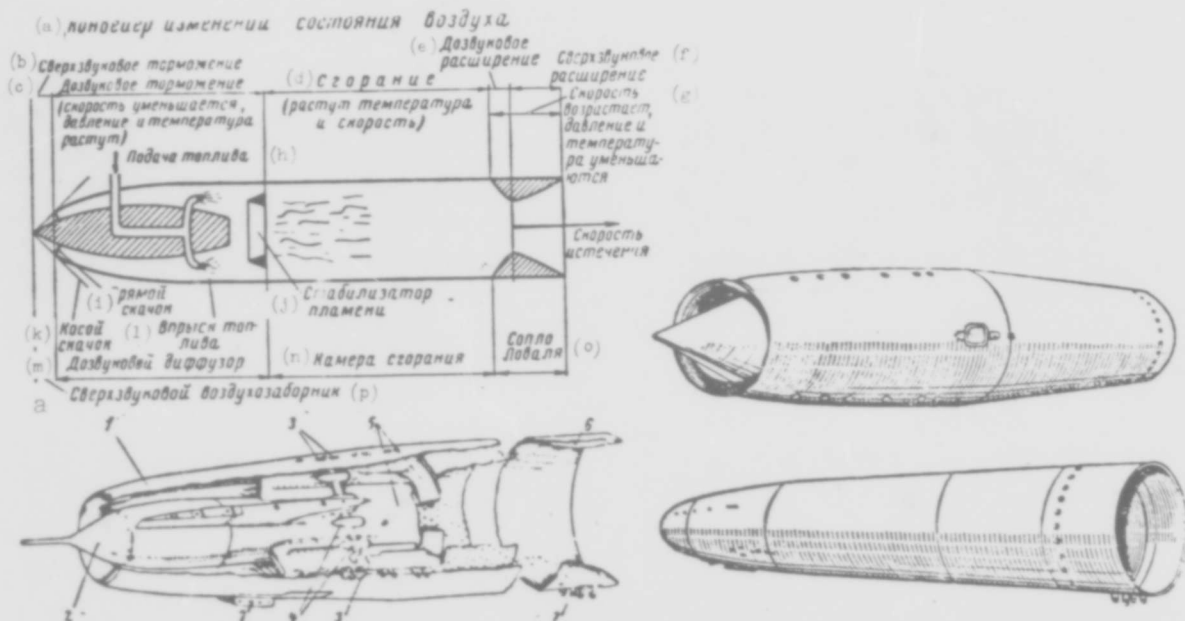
Supersonic ramjet engine: a) diagram of the engine; b) cross section of English supersonic ramjet engine "Thor"; c) outer view of the engine "Thor" and its bench test: 1 - body of the engine 2 - central body; 3 - igniters; 4 - fuel spray nozzles; 5 - flame holder; 6 - jet nozzle; 7 - bracing support of the engine. KEY: (a) "Conveyor" of the change of the state of air; (b) Supersonic deceleration; (c) Subsonic deceleration (speed decreases, pressure and temperature increase); (d) Combustion (temperature and speed increases); (e) Subsonic expansion; (f) Supersonic expansion; (g) Speed increases, pressure and temperature decrease; (h) Fuel feed; (i) Normal shock; (j) Flame holder; (k) Oblique jump; (l) Fuel injection; (m) Subsonic diffuser; (n) Combustion chamber; (o) Laval nozzle; (p) Supersonic air inlet.
